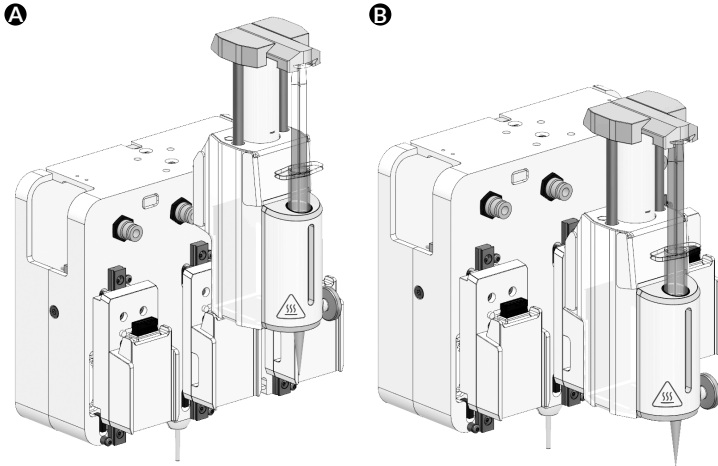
Inserting the Syringe Printhead into the BIO X printhead mount.
